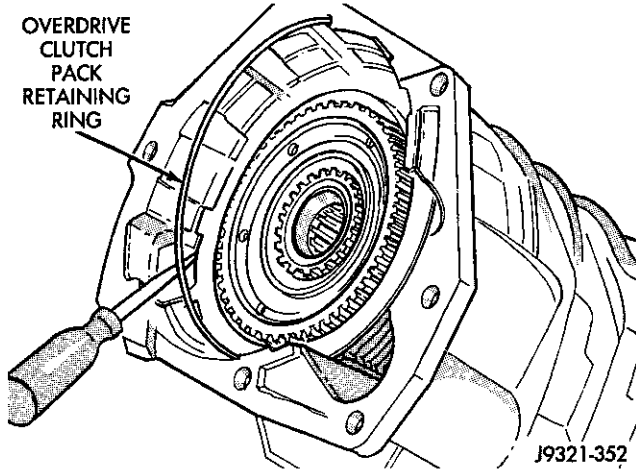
Removing Overdrive Clutch Pack Retaining Ring
